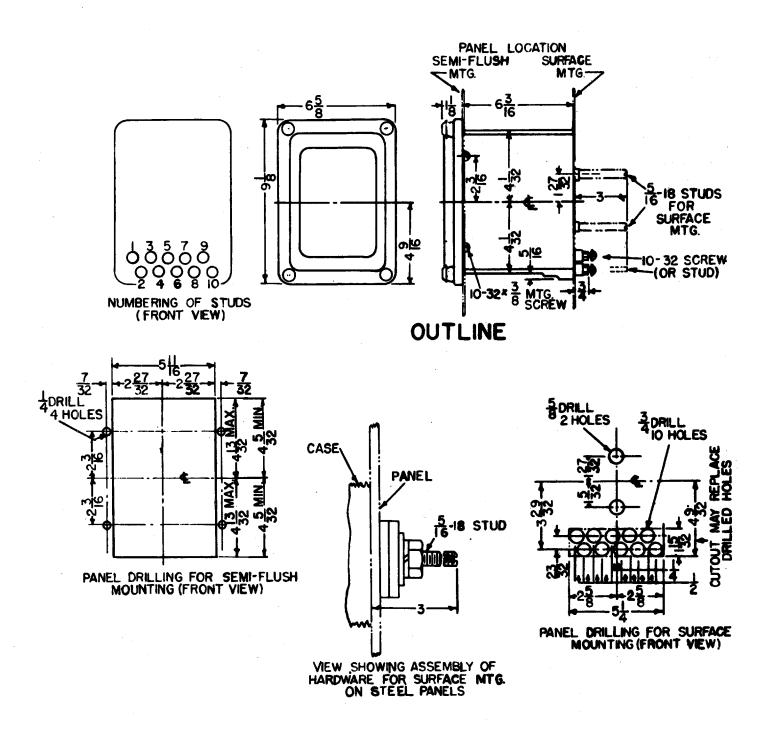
(6209271-3) Outline & Panel Drilling Dimensions For The Type SCAllA Relays.
